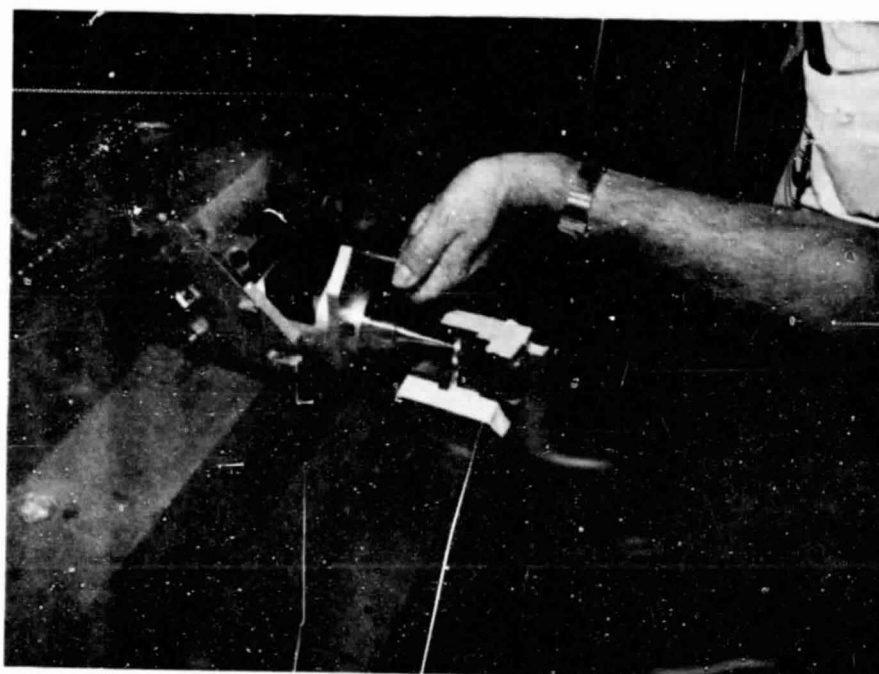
Ultrasonic seam welding an aluminum interconnect foil to a dendritic web solar cell.
